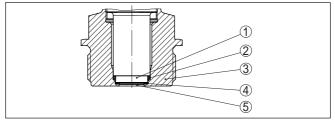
Front-flush installation of the measuring cell (example: thread G11/2)
